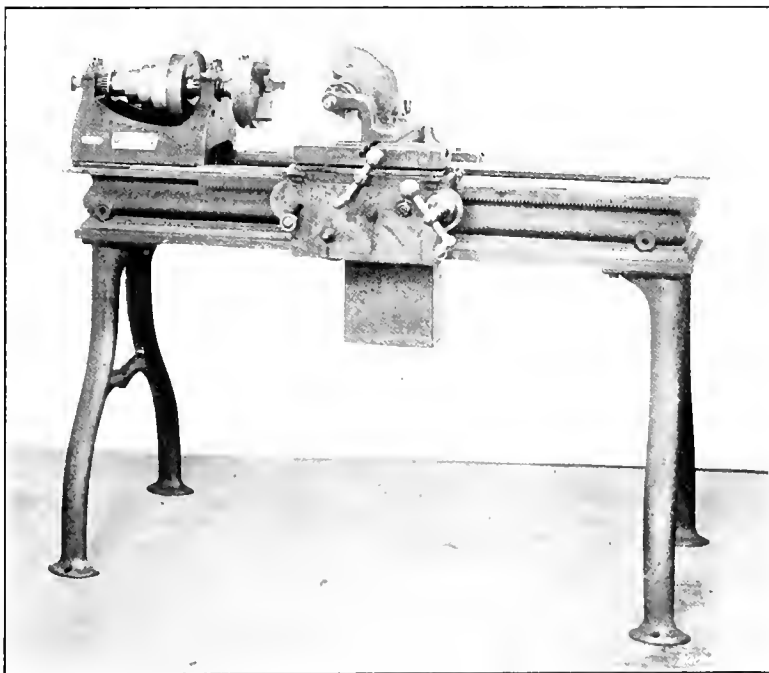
One of the Original Brown & Sharpe Grinding Machines—a 14-inch Putnam Lathe converted for the Purpose
